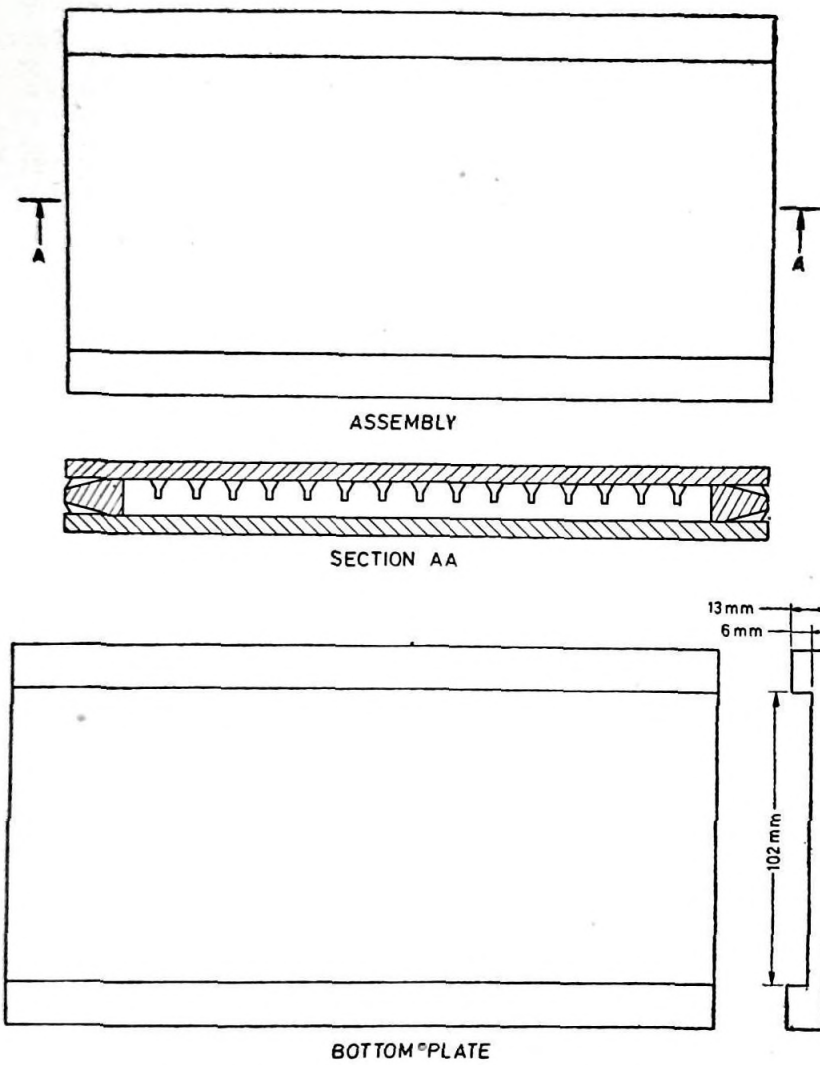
MOULD WITH TOP AND BOTTOM PLATES
